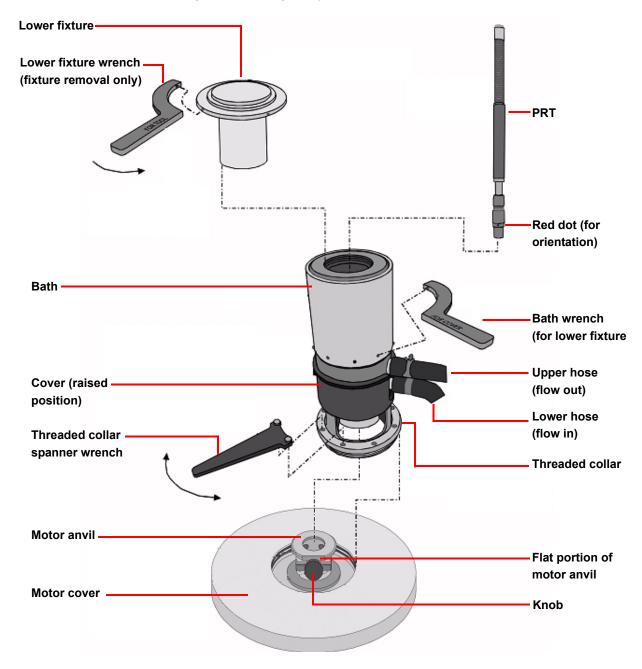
Overview of Sealed Fluid Bath assembly and installation.
